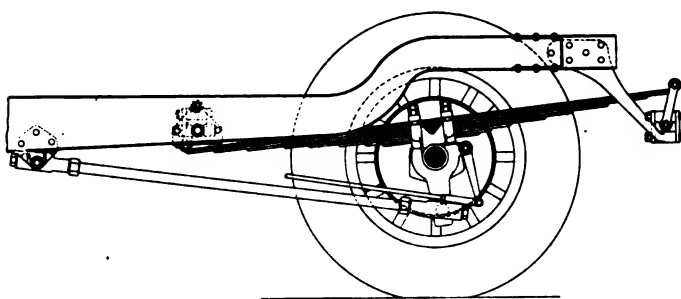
SCHEMATIC DRAWING OF A RECENTLY DEVELOPED SPRING-SUSPENSION
